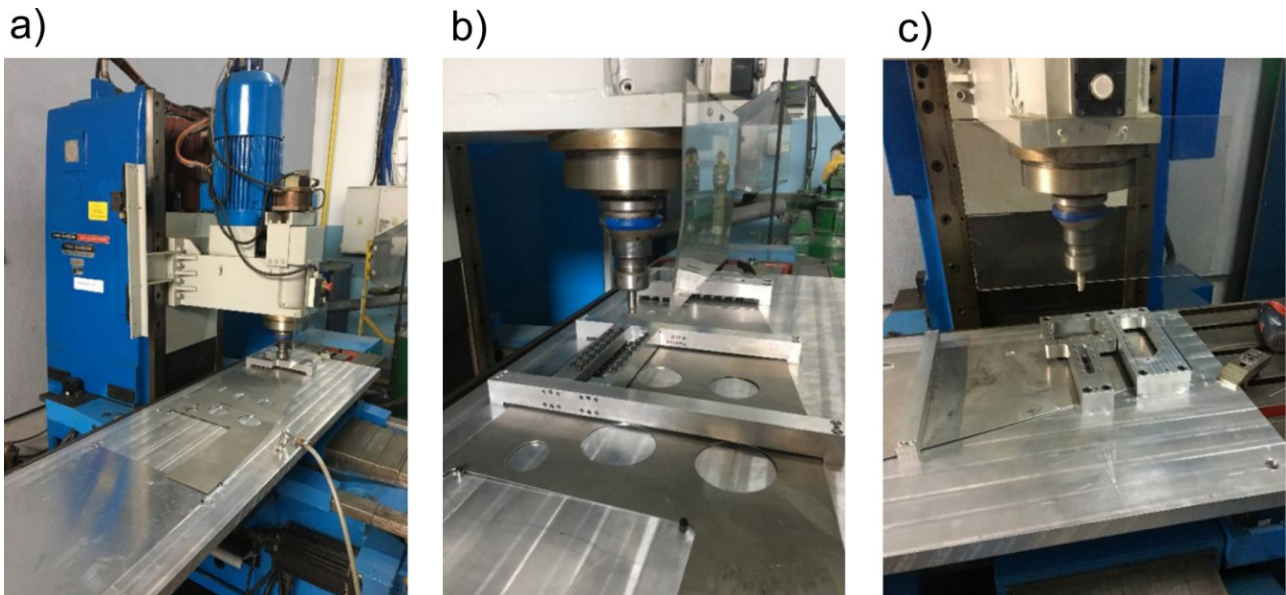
The CNC machines adopted for FSW process with mounted tools, a) general view, b) and c) close-up view
